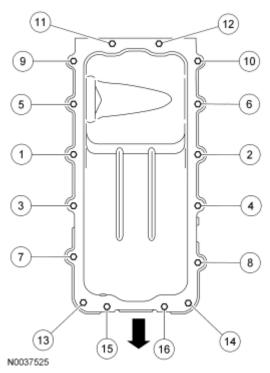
Oil Pan Bolts Removal Sequence Courtesy of FORD MOTOR CO.
